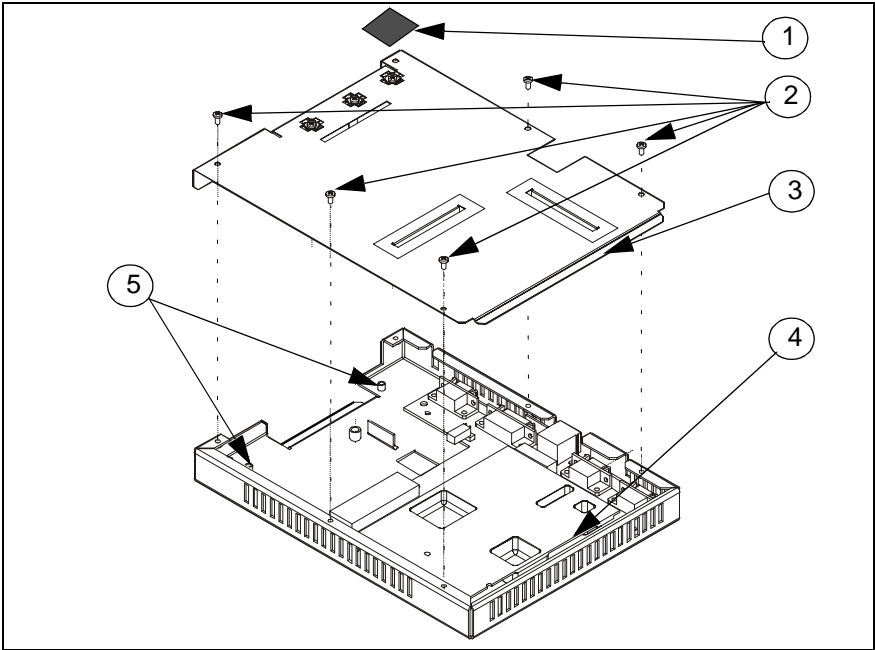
Comm Option Subassembly Cover Removal/Installation; Location of MIB 1&2 Mounting Posts ⑤
